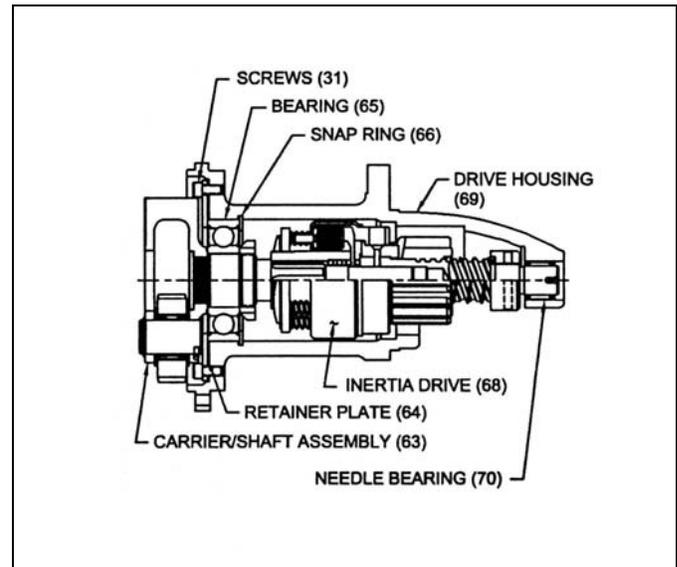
Gearbox/Drive Housing Installation (T106F/T112F)
